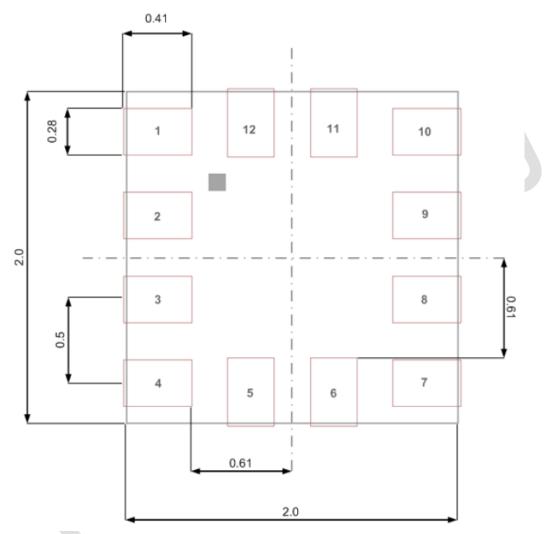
SMA130 footprint. All dimensions are given in mm.
